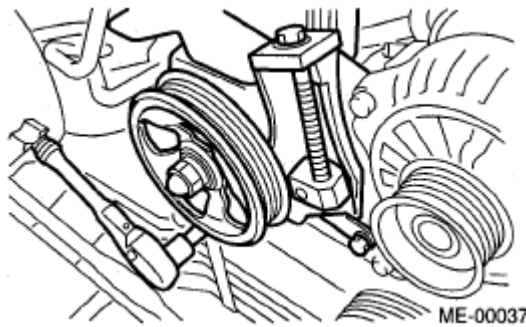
Removing Bolts Which Secure Power Steering Pump To Bracket
